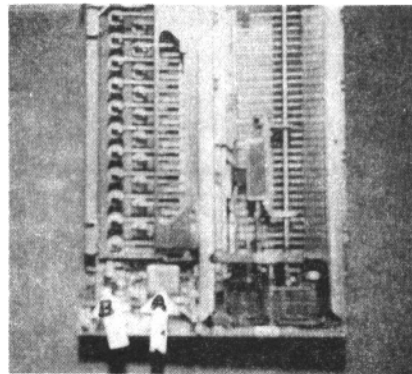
Bottom view of keyboard, typing key guard plate removed. A - keyboard contact filter. B - break switch.
